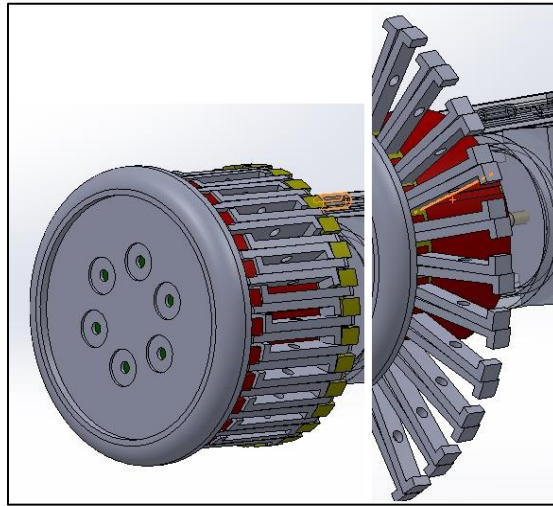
New 5-inch to 8.5-inch expanding wheel design.
